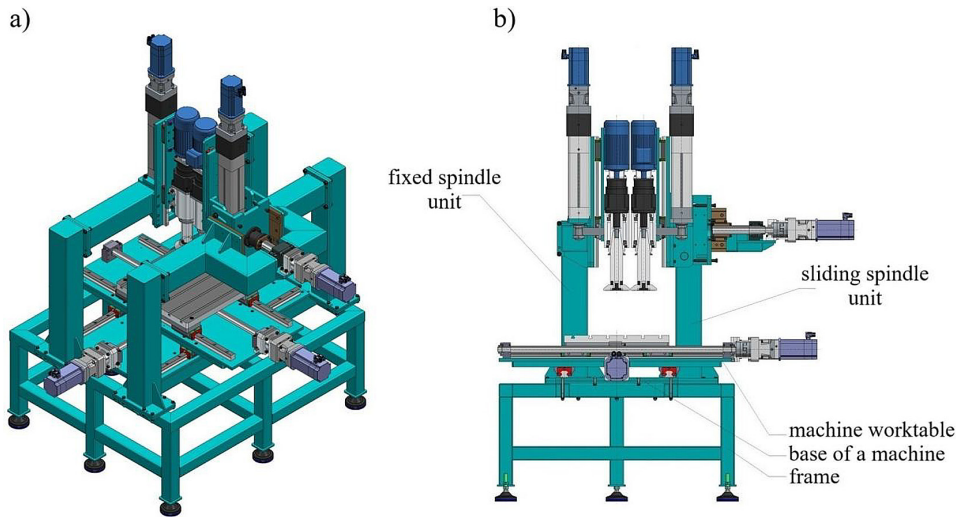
Numerically controlled machine designed at Lublin University of Technology for incremental forming of thin-walled products: (a) isometric view, (b) side view
